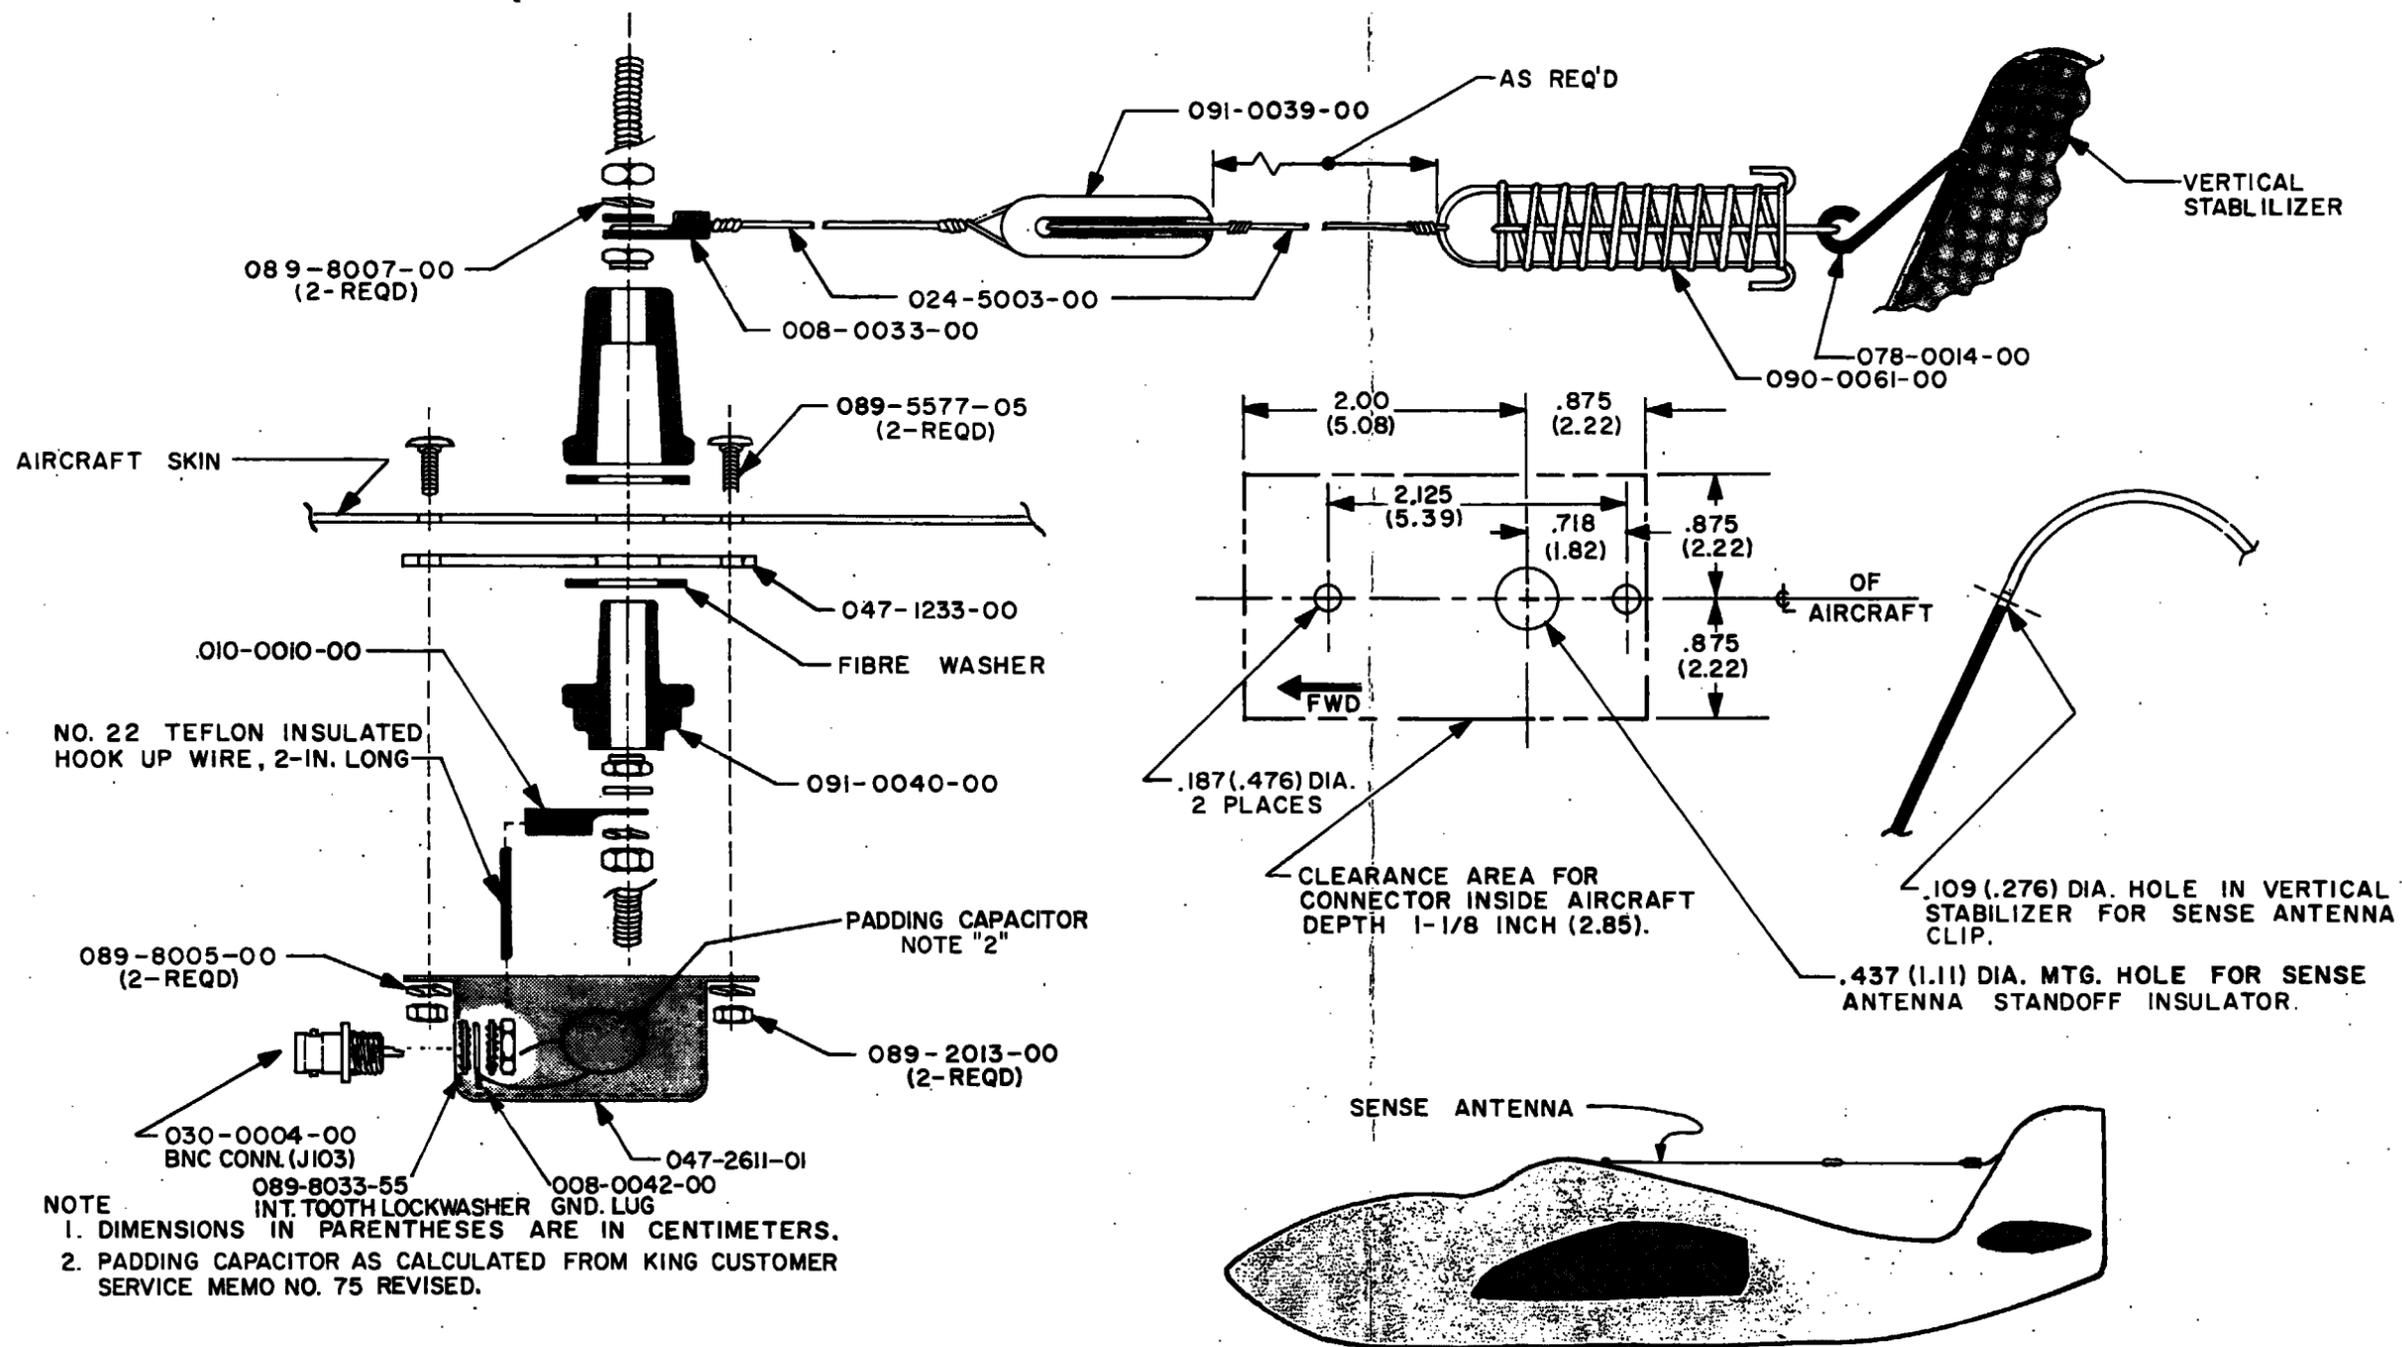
KR 86 SENSE ANTENNA ASSEMBLY AND INSTALLATION DRAWING
